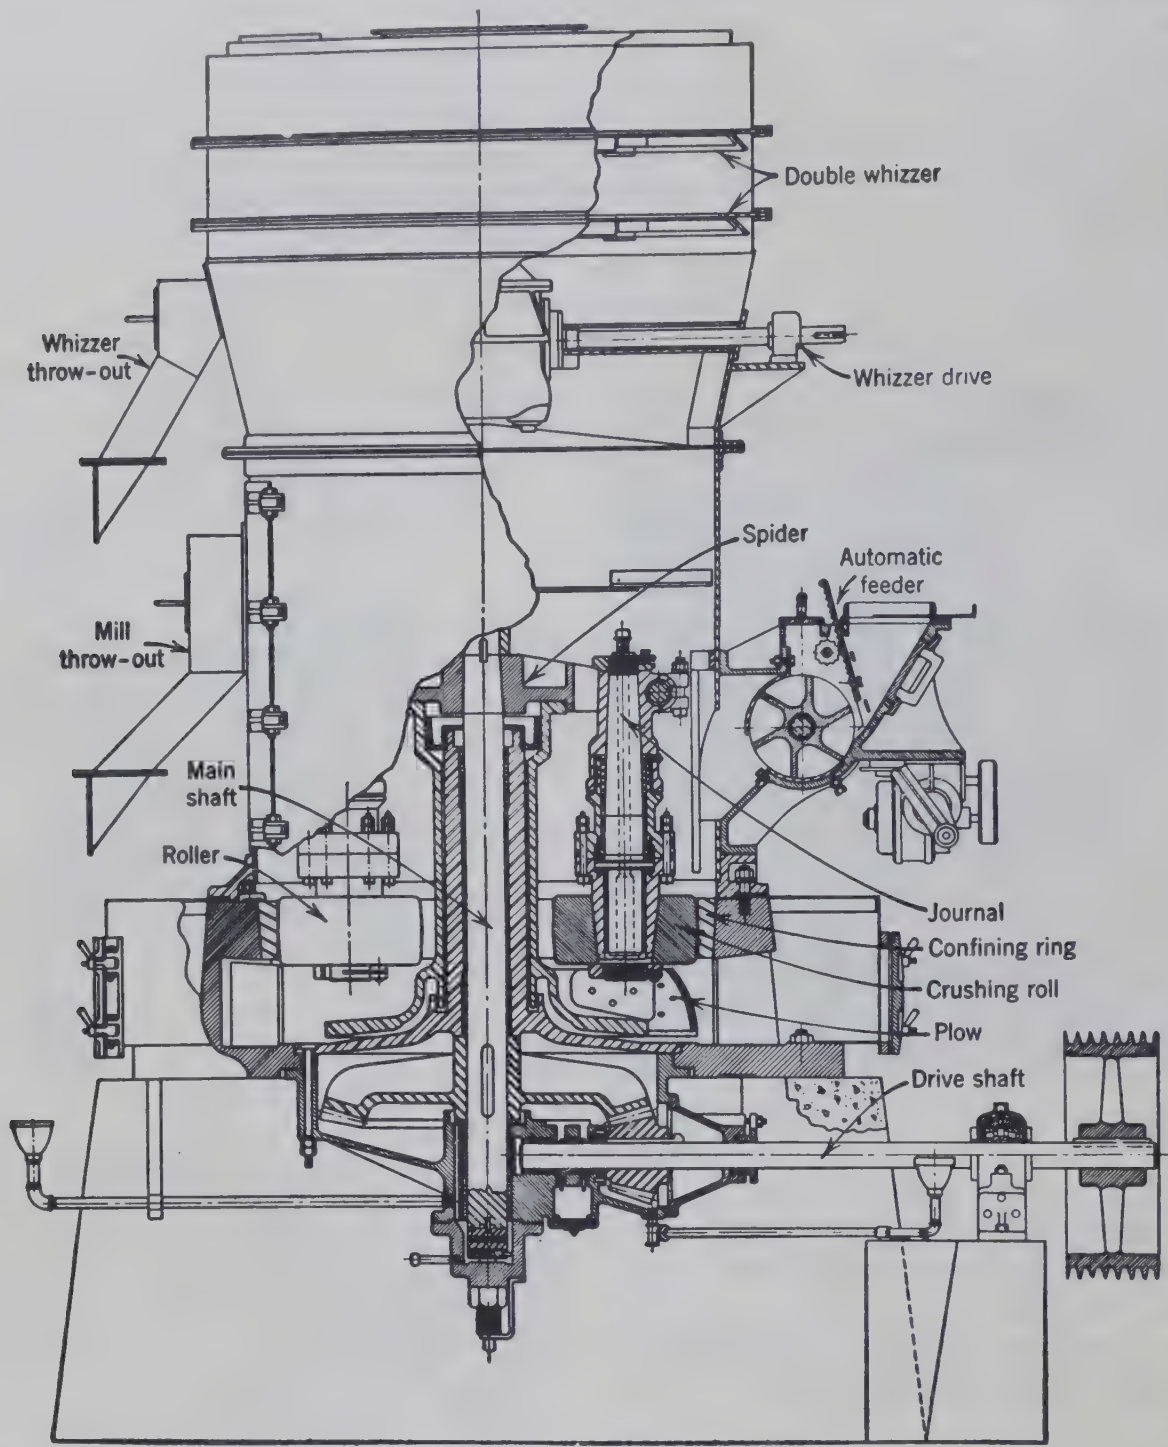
Cutaway and sectional diagram of Raymond roller mill with air classifier or separator. (*Combustion Engineering Co.*)
